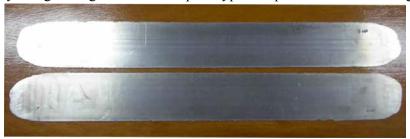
(U-Mo) - (Al-Si) dispersion mini-plate
